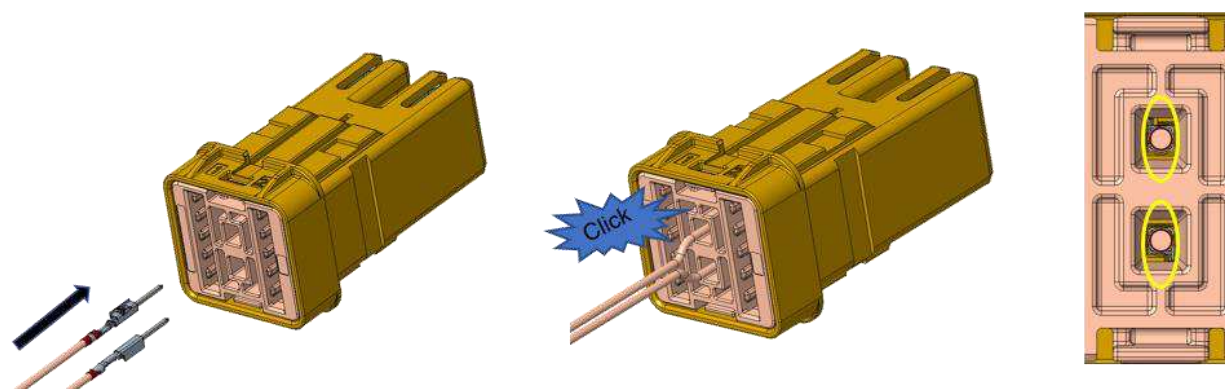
HVIL cable sub-assembly inserting in the Header assembly
